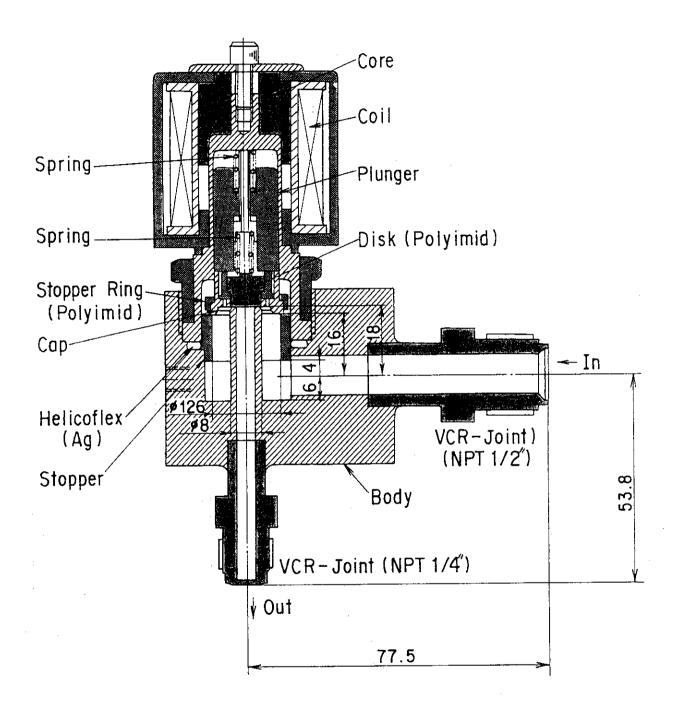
(b) Cross-sectional view of the fast-opening magnetic valve. A diameter of the orifice is 4.5 mm.
